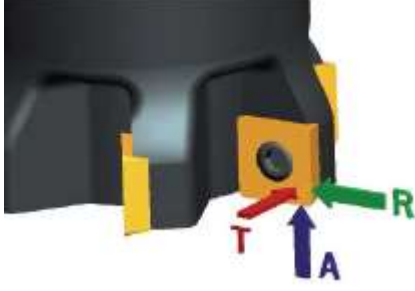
Directions of a force acting on a cutting tool for milling [9].
